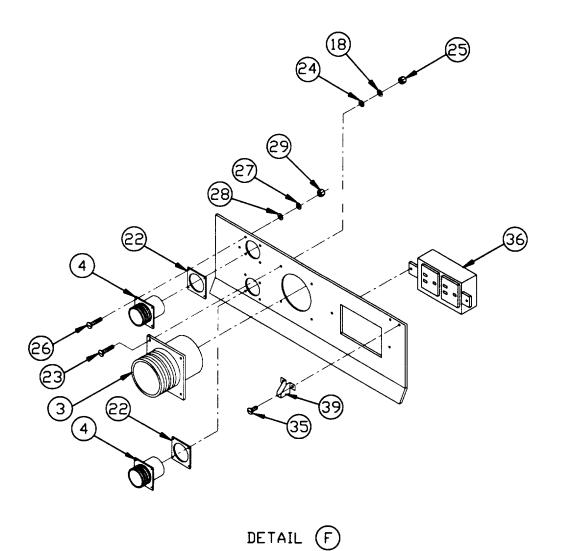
POWER ENTRANCE ASSEMBLY (SHEET 7 OF 7)
